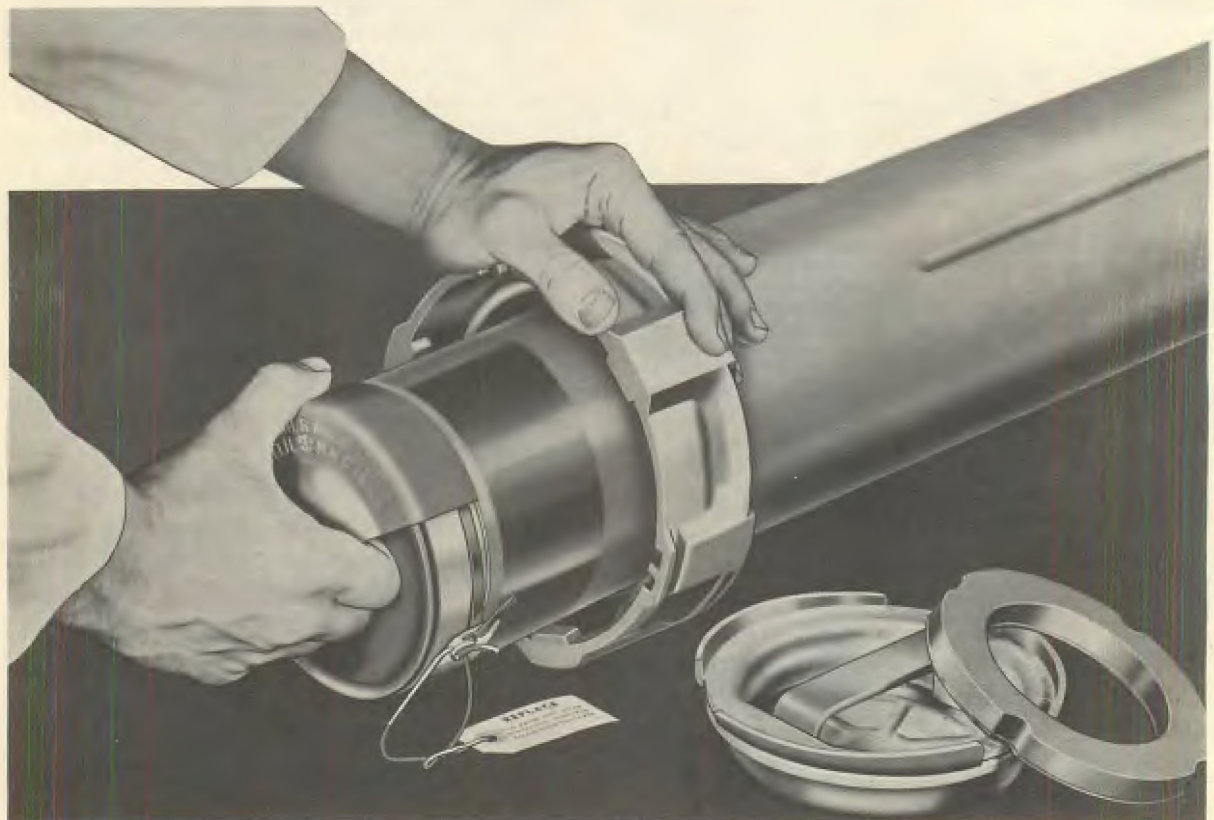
Use of Extractor in Removal of 5.0-Inch Rocket Motor from Rocket Container Mk 10 Mod 0.
